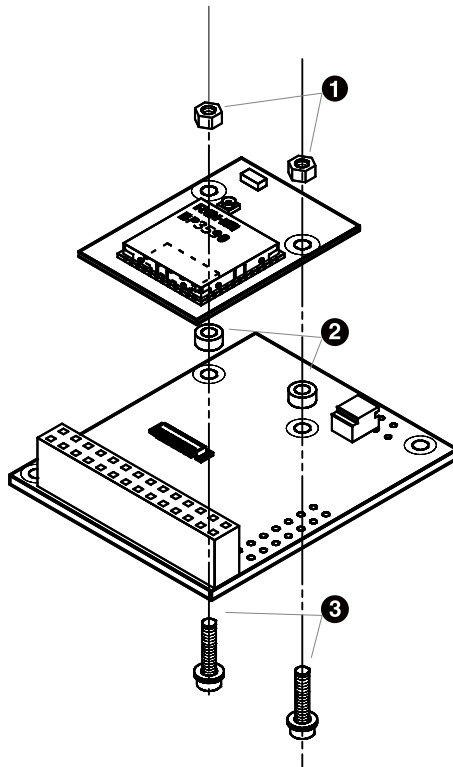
AWL12 and WLAN Interface Board (AWL12 Compatible) Assembly Diagram
